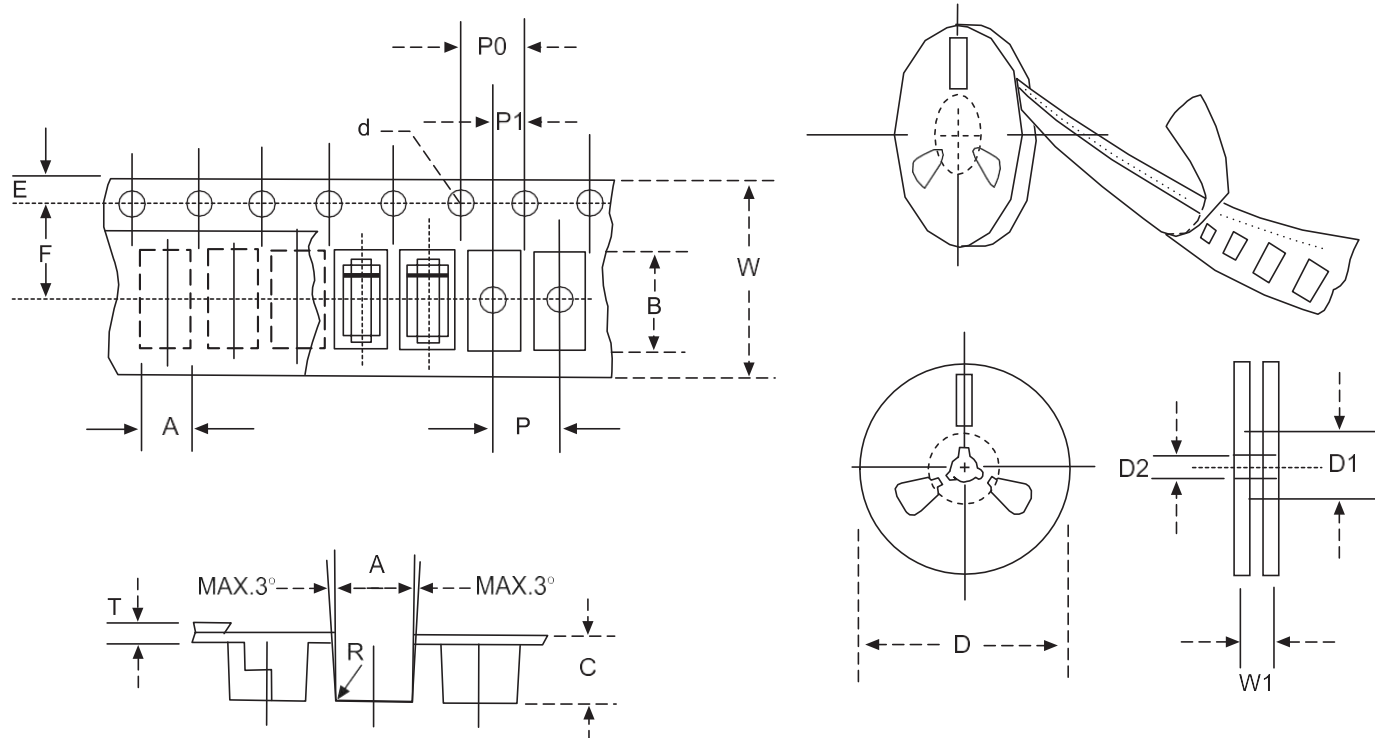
FIG: CONFIGURATION OF SURFACE MOUNTED DEVICES TAPING
